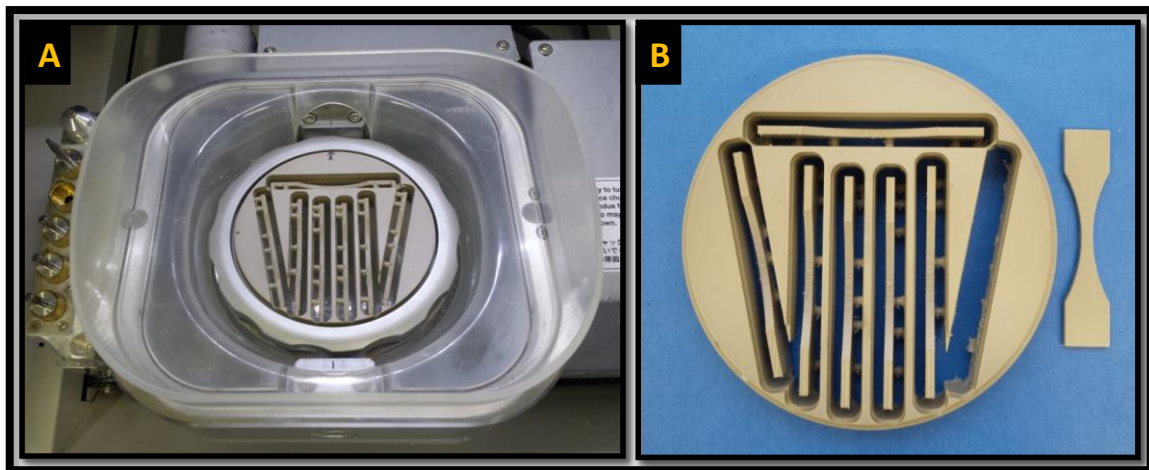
A. samples for tensile test fabricated using milling machine; B. tensile specimens made of PEEK-Juvora™
